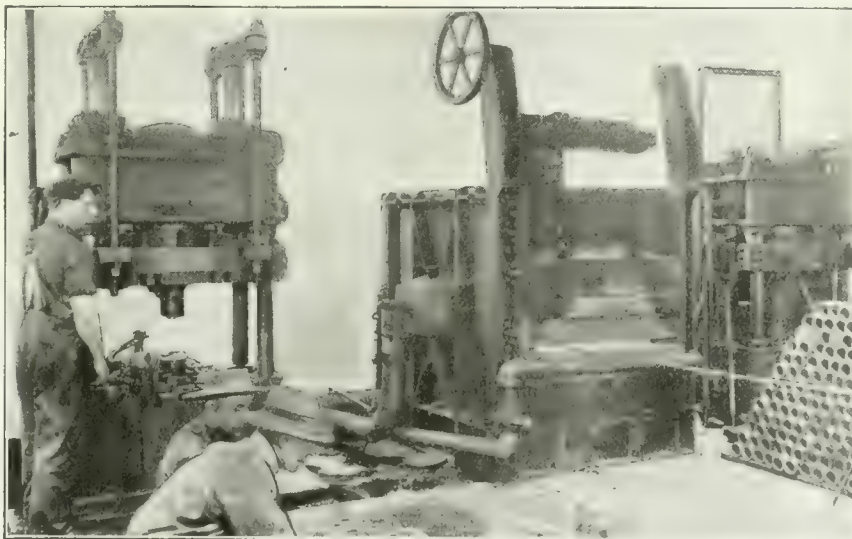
"MECHANICAL ENGINEERING CO." OIL FURNACE AND "BOOMER & BOSCHERT" PRESSES FOR PRODUCING SHRAPNEL SHELL DIAPHRAGMS
